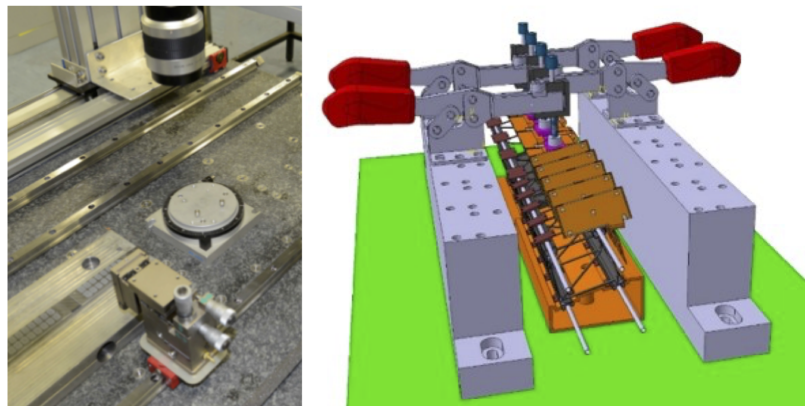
Left: jig, module handling tool, glue deposition tool for inclined-module loading. Right: Clamping tool concept for loading vertical inclined modules.
